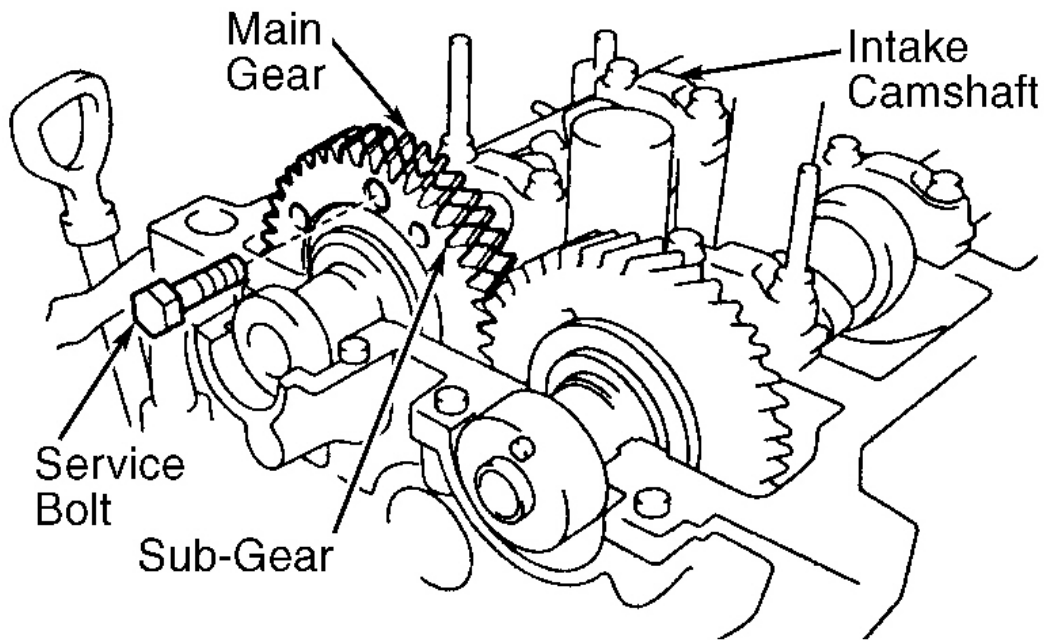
Positioning Intake Camshaft Service Bolt Hole
